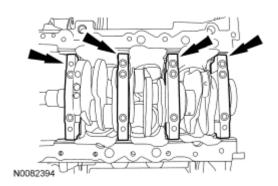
Identifying Main Bearing Cap Bolts Courtesy of FORD MOTOR CO.
